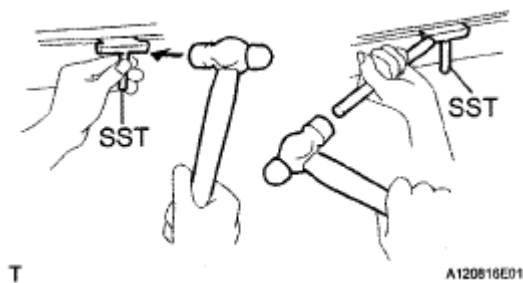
Removing No. 2 Oil Pan Sub-Assembly
